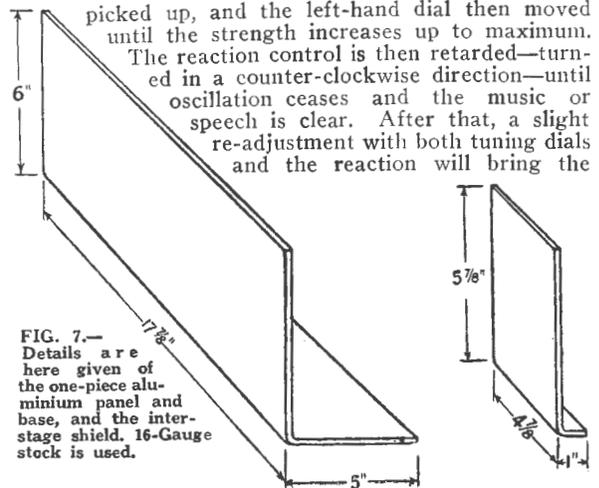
Details are here given of the one-piece aluminium panel and base, and the inter-stage shield. 16-Gauge stock is used.
